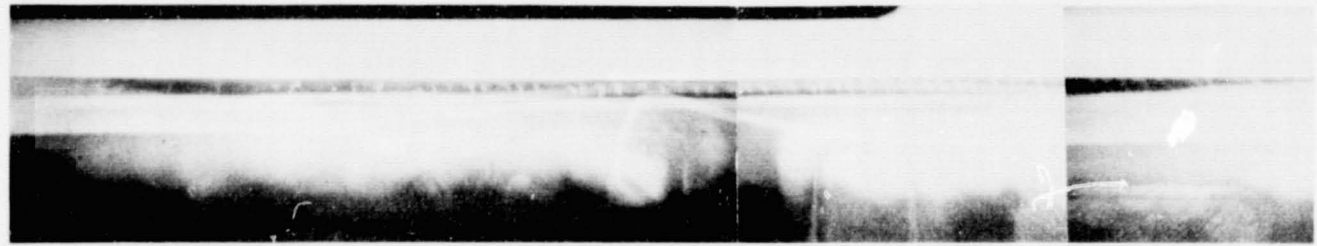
X-ray of Sealed Hybrid Showing Weld Splatter
